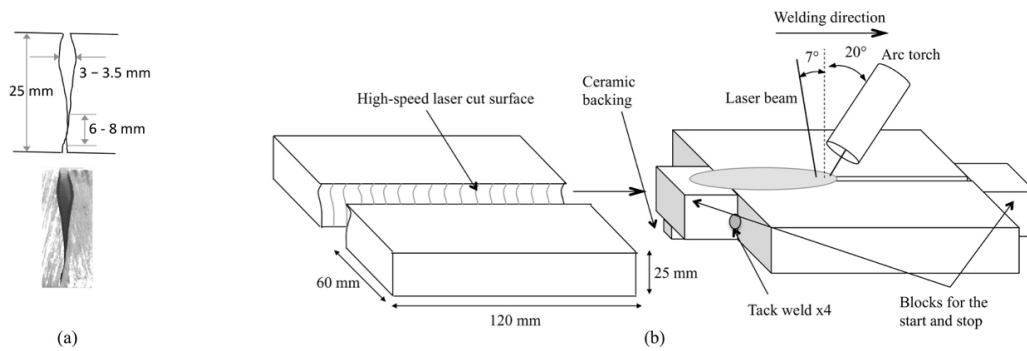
Preparation and setup for single-pass welding: (a) groove geometry, (b) overall procedure.
